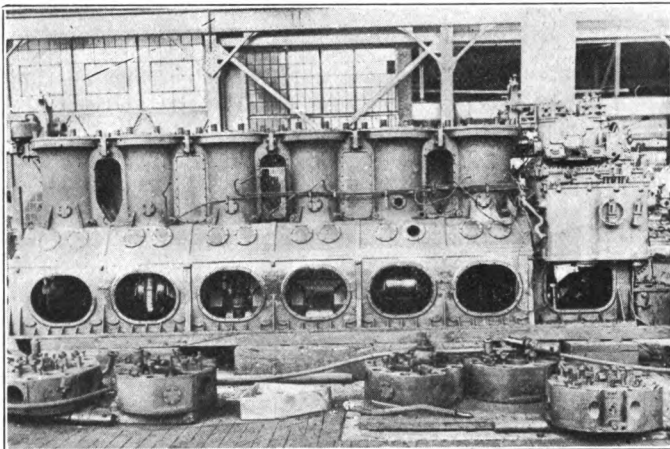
SIDE VIEW OF A 1200-HP. DIESEL ENGINE SHOWING THE STEEL CONSTRUCTION OF THE BEDPLATE AND THE HOUSING WHICH ARE INTEGRAL UP TO THE BASE OF THE CYLINDER JACKET
